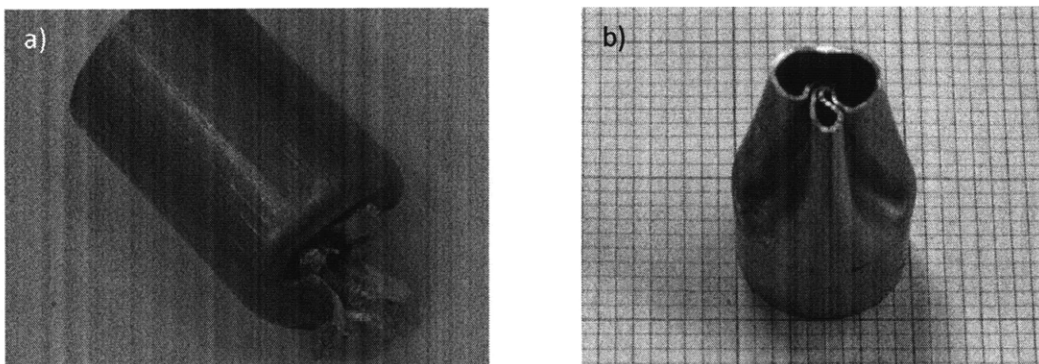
a) Outer workpiece deformation without inner workpiece, tested with the EMW machine at PULSAR, in Israel.
